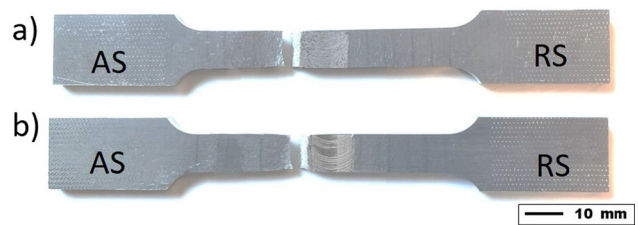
Fracture locations of the welds produced with the tapered cylindrical pin (a) and the hexagonal pin with grooves (b)
